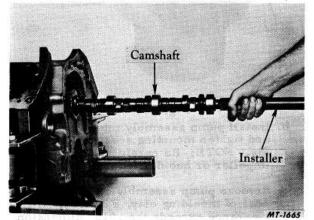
Use of SE-1880 Camshaft Installer and Adapter SE-1880-2
